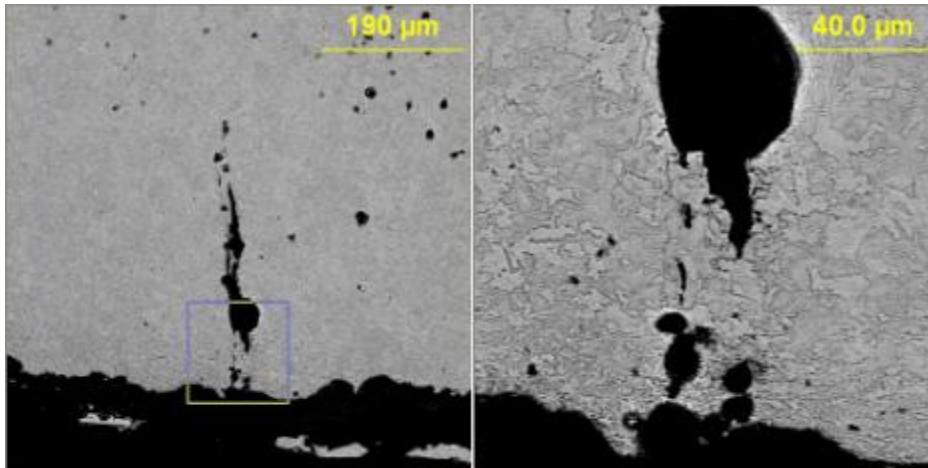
Internal lack of fusion along the weld centerline, the most likely cause for failure initiation, as shown in the fractograph in Figure 4.
